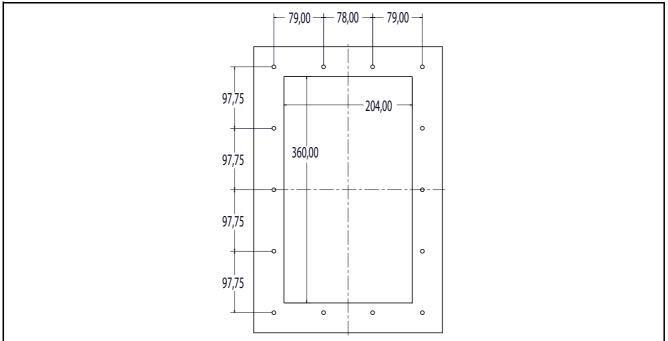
Dimensions of breakthrough for push-through heat sink [mm]
